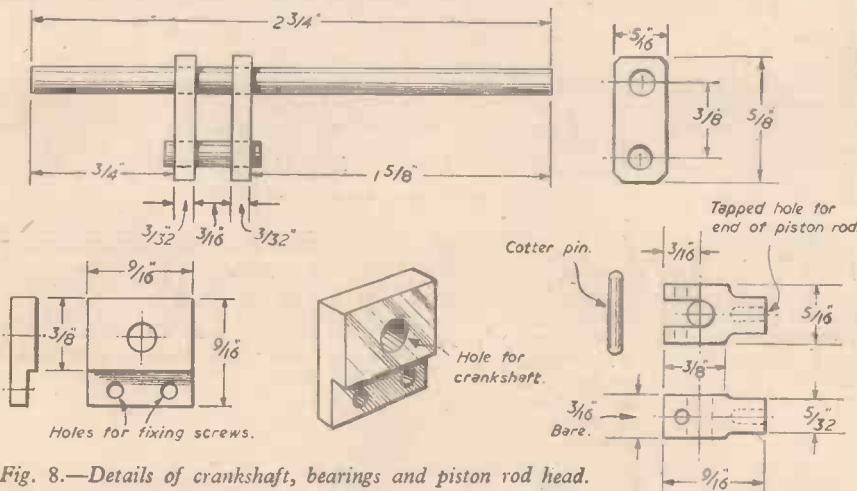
Details of crankshaft, bearings and piston rod head.
